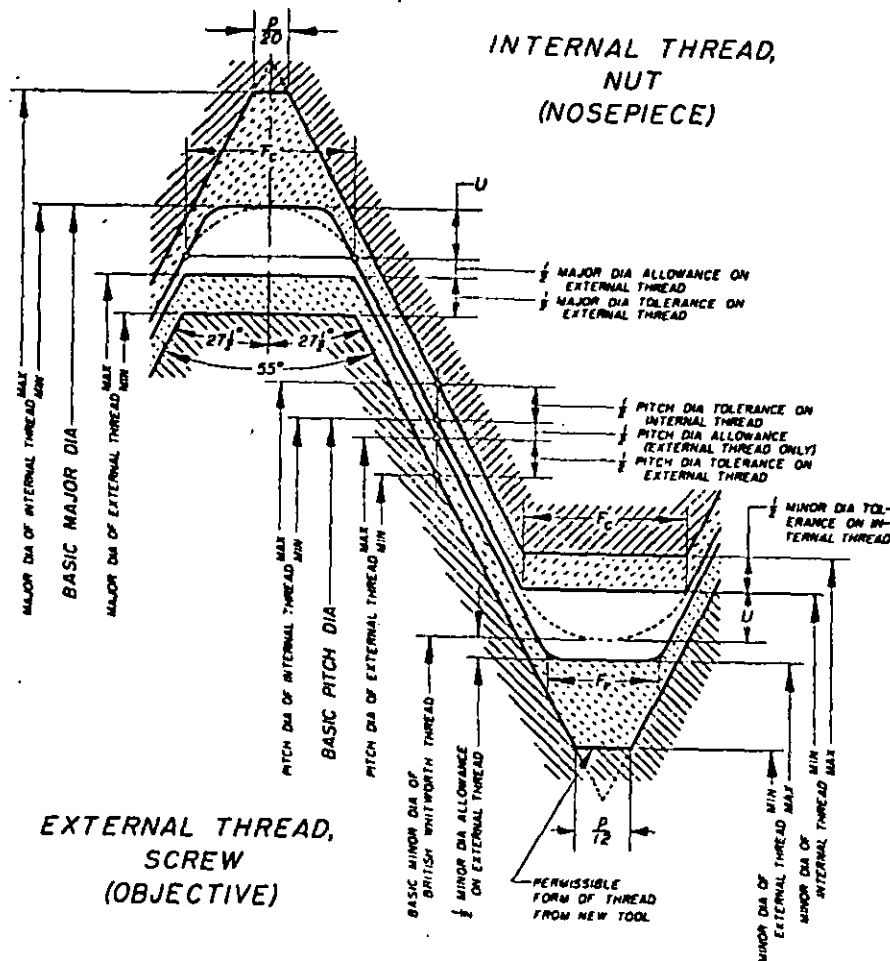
Disposition of tolerances, allowances, and crest clearances for 0.800-36 AMO thread.
